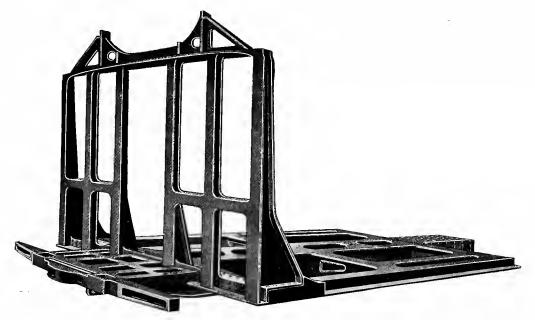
Commonwealth Steel Company's Upright End Frame in One Piece, and Commonwealth Combined Platform and Double Body Bolster for Vestibuled Cars.
